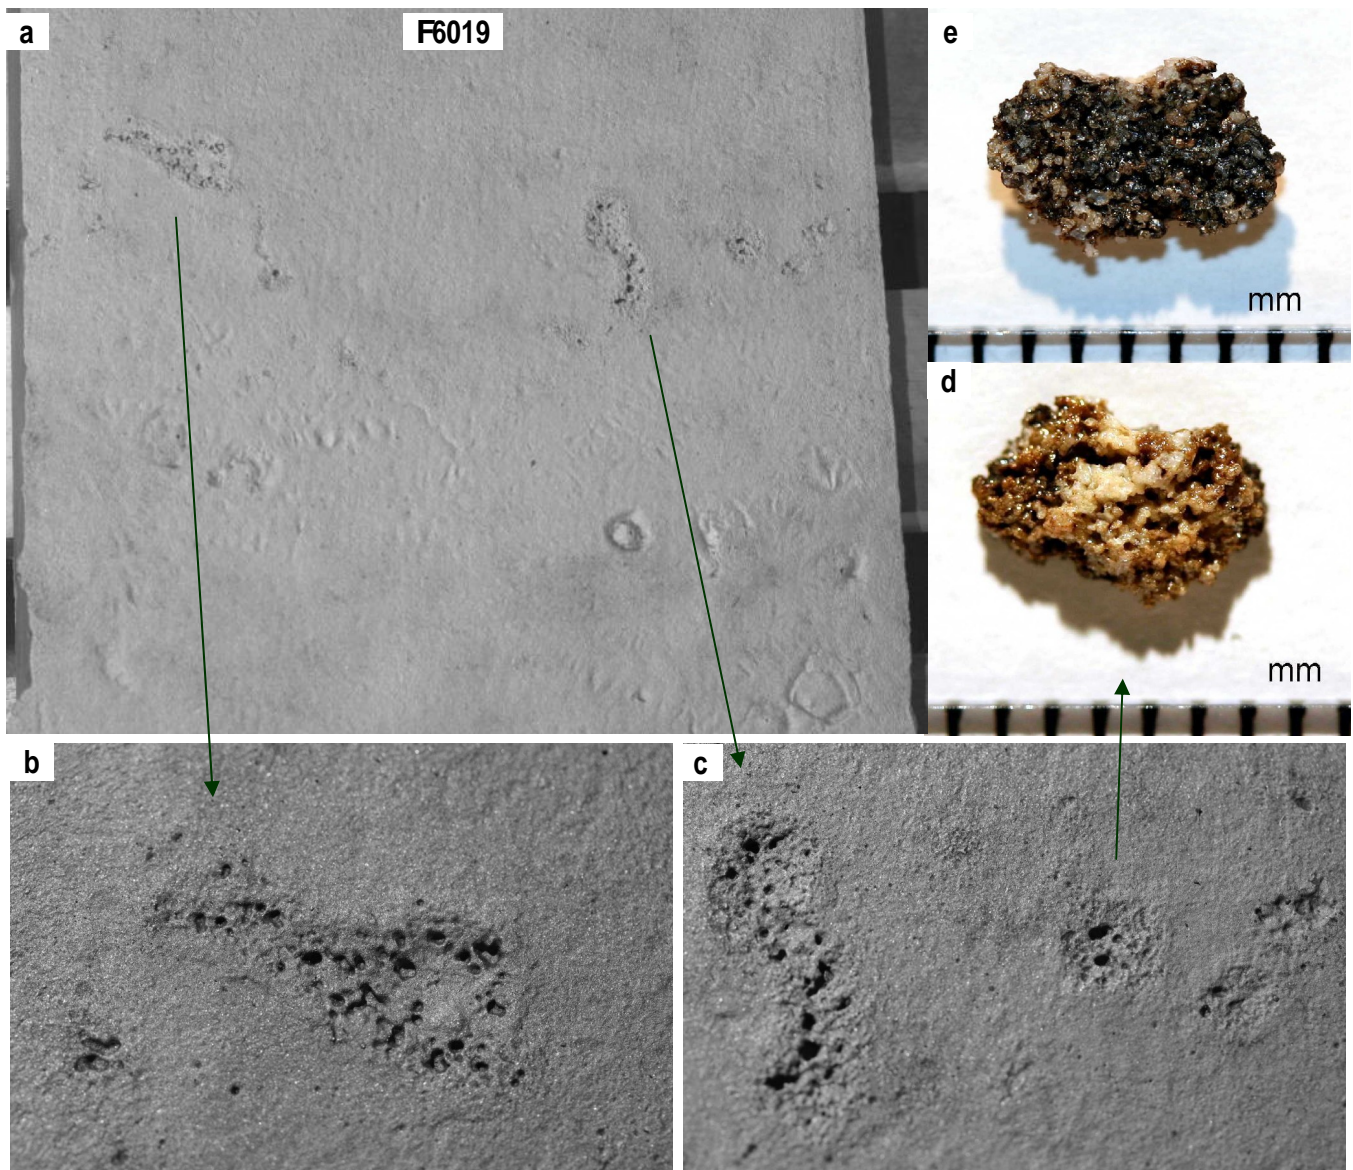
Wedge-block casting from Heat F6019 (not included in the results), showing more “Ceroxide defects. (a) general view of the cope surface (b) and (c) enlarged views, (d) adherent sand lifted off the defect surface with a knife edge (face attached to steel surface). It has the matching gas holes. (e) the other face of the attached sand showing the beginning of the burnt layer, which extended 2-6 mm into the sand.
